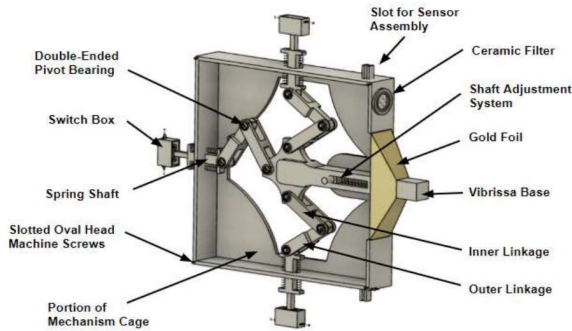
Trigeminal mechanism components with a section of the mechanism cage removed for improved interior visualization.
